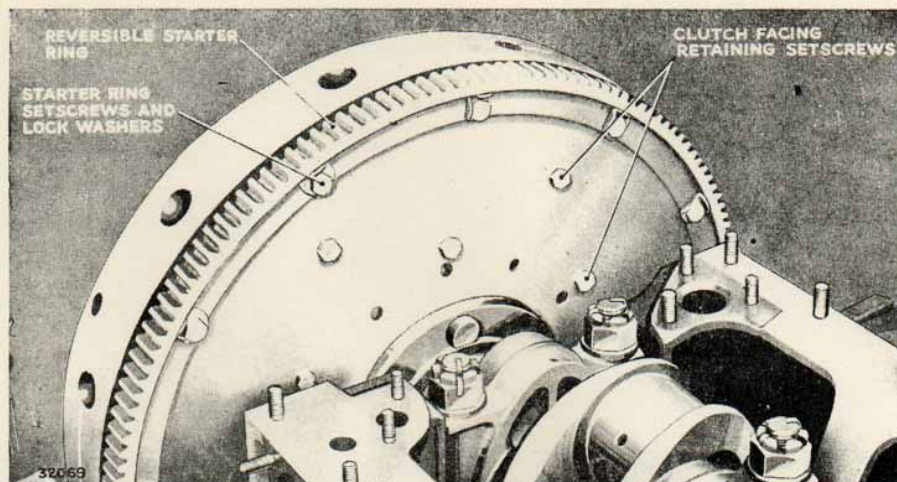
REAR VIEW OF FLYWHEEL AND STARTER RING.
